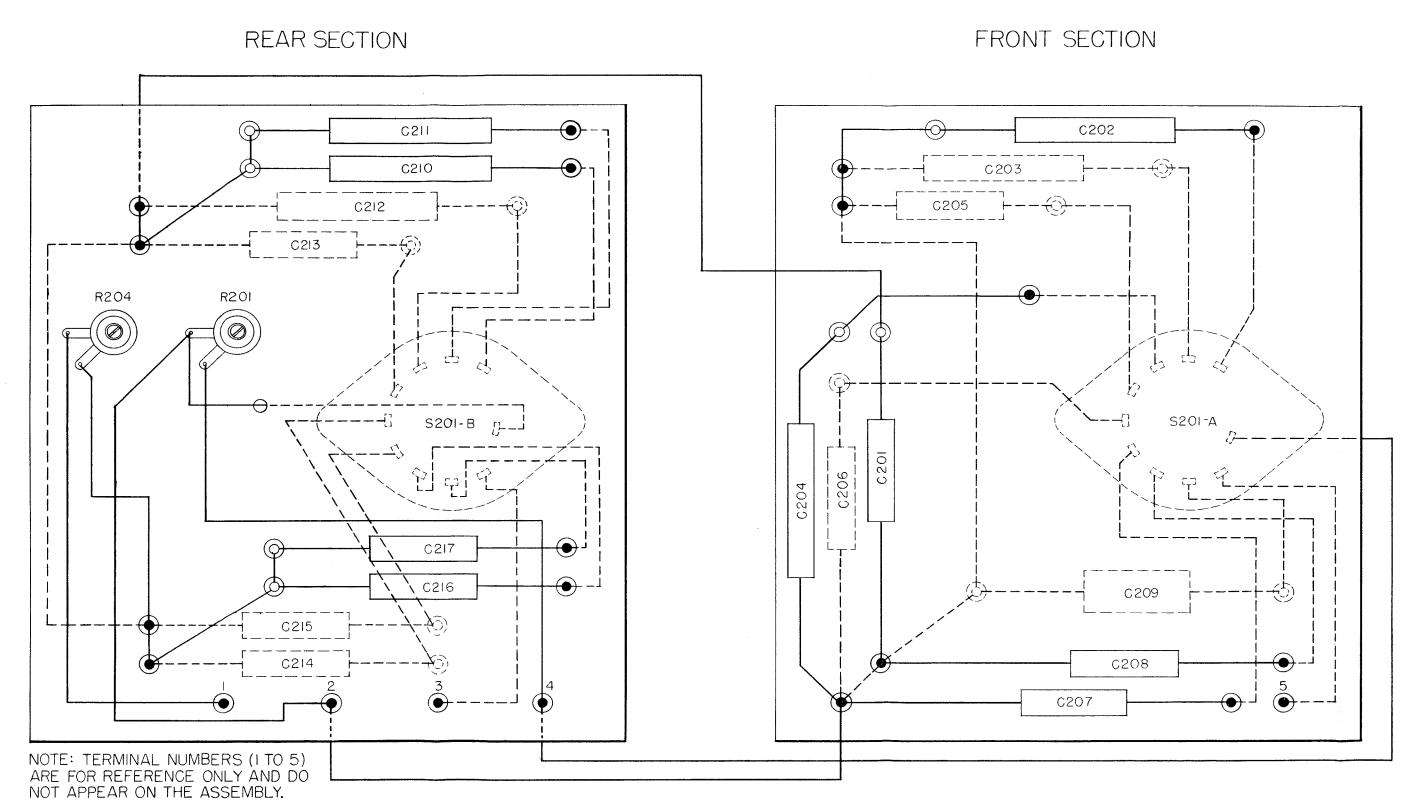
Comparator Chassis-Panel Assembly, Wiring Diagram
